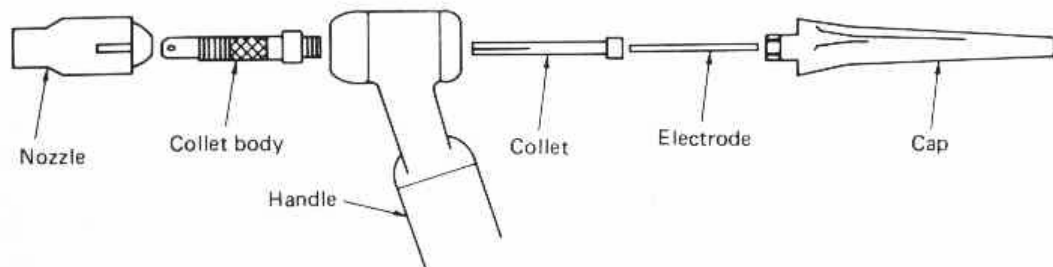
Key components of a TIG welding manual torch (ASM, 2002)
